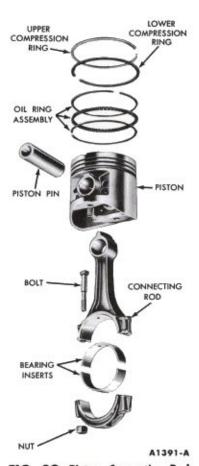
Piston, Connecting Rod and Related Parts—Typical
